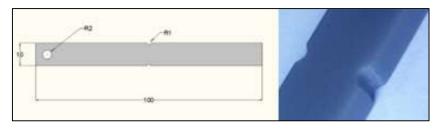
Notched fatigue specimen (all dimensions are in mm)
